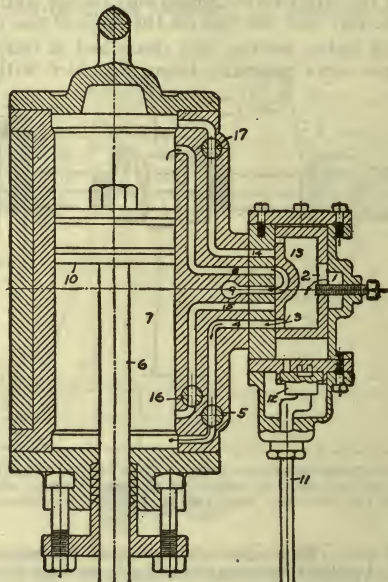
Sectional view of *American* deep well pumping head showing valve. In the position shown the steam is passing through ports 1, 2, 3, 4, and choke valve 5, into the cylinder 7. Piston rod 6, is connected to the pumping rods that extend down into the well to the water plunger. The number of strokes is regulated by the choke valves 5, 16 and 17. Port 8, is opened for the exhaust of steam out through 9. Just before the piston 10, reaches the end of its stroke, it closes the exhaust port 8, and forms a cushion. At the same time the valve stem 11, is also turned by a roller on the cross head, striking a finger cam on the valve stem. The movement changes the position of the auxiliary valve 12. Steam will then flow through suitable ports and will move the valve 13, so that port 14, is uncovered, allowing steam to enter the upper end of the cylinder and cause the piston to move in the reverse direction. At the same time port 15, is brought into communication with exhaust 9. Choke valve 16, controls the exhaust and helps the regulation of the pump. In operating a single acting cylinder, where the weight of pump rods is heavier than water, no steam is used on the down stroke; then valve 17, is closed and valve 16, shut sufficiently to sustain the weight of the pump rods and give the required number of strokes. When the double acting and two stroke cylinders are used, valve 17 is opened sufficiently to give a uniformity to up and down strokes.
